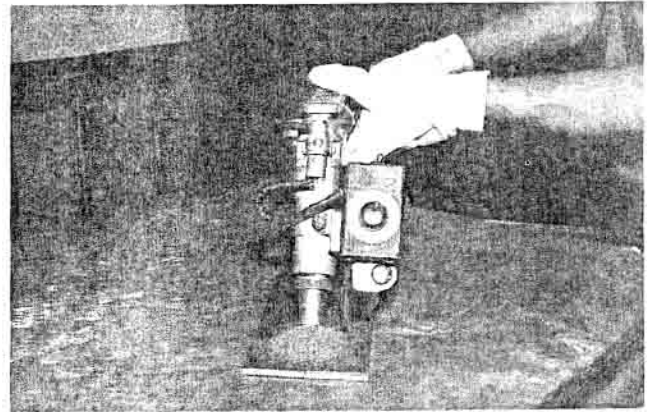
Mechanized Squirt Welding Gun — K-114.
